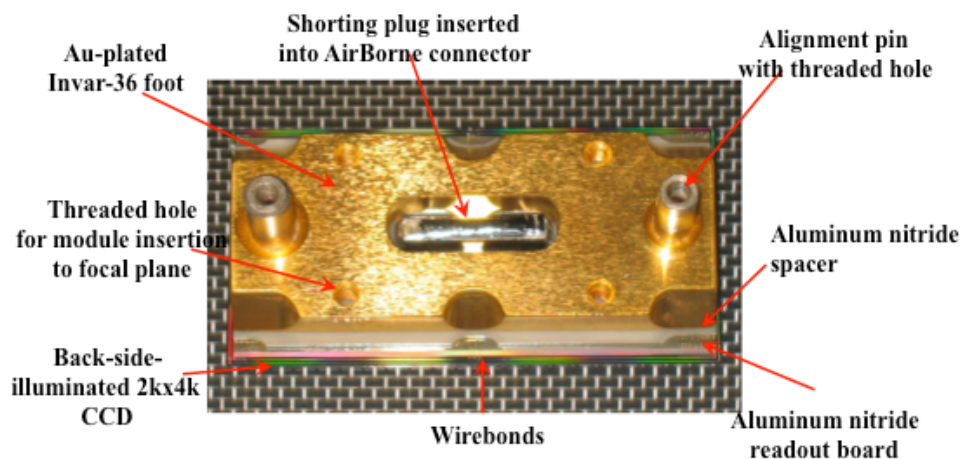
View of underside of a pedestal package sitting on a gel-pack showing the Au-plated INVAR foot, two alignment pins, the connector, the edge of the AlN blank with cut-outs for the wirebonds and the edge of the CCD
